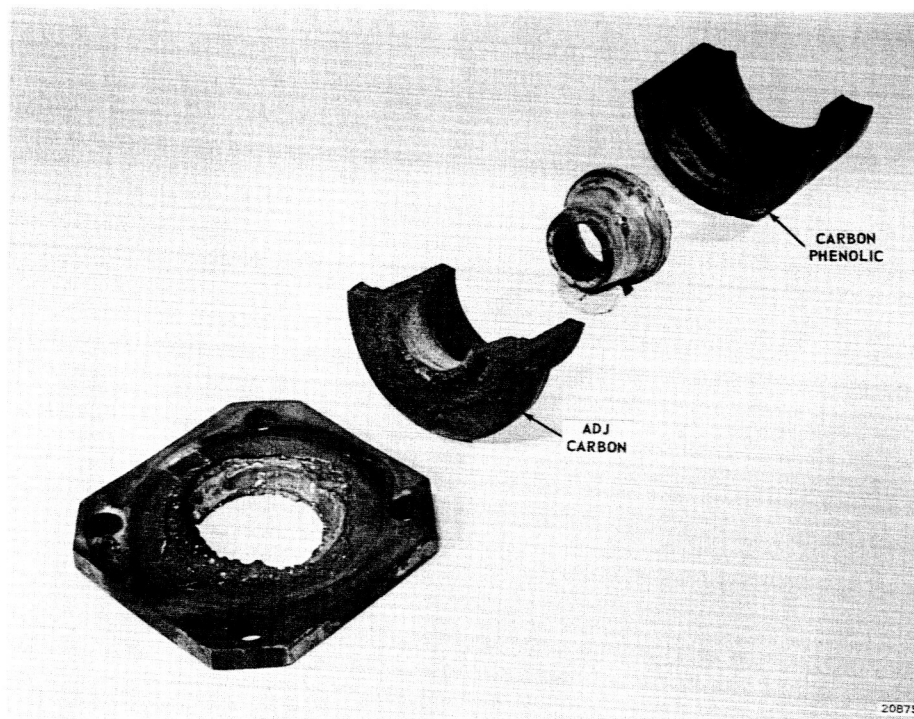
Valve Outlet Orifice, Insulation and Retainer Plate
